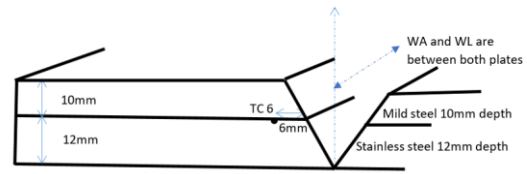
Side view of weld plan and thermocouple positions TC6.
